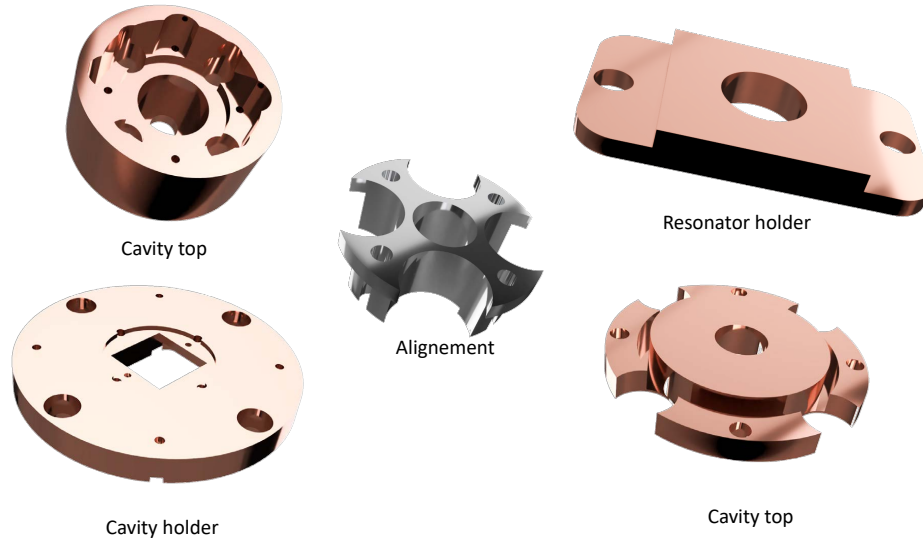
3D views of the mechanical parts of the cavity. The different parts are not to scale from one to the other.
